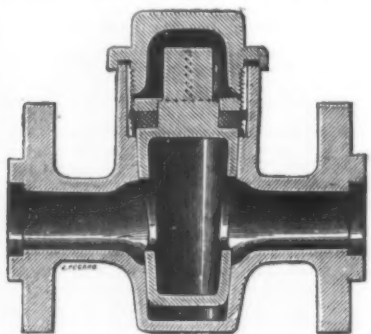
TYPE OF COCKS USED IN THE PICTET ICE MACHINE.
